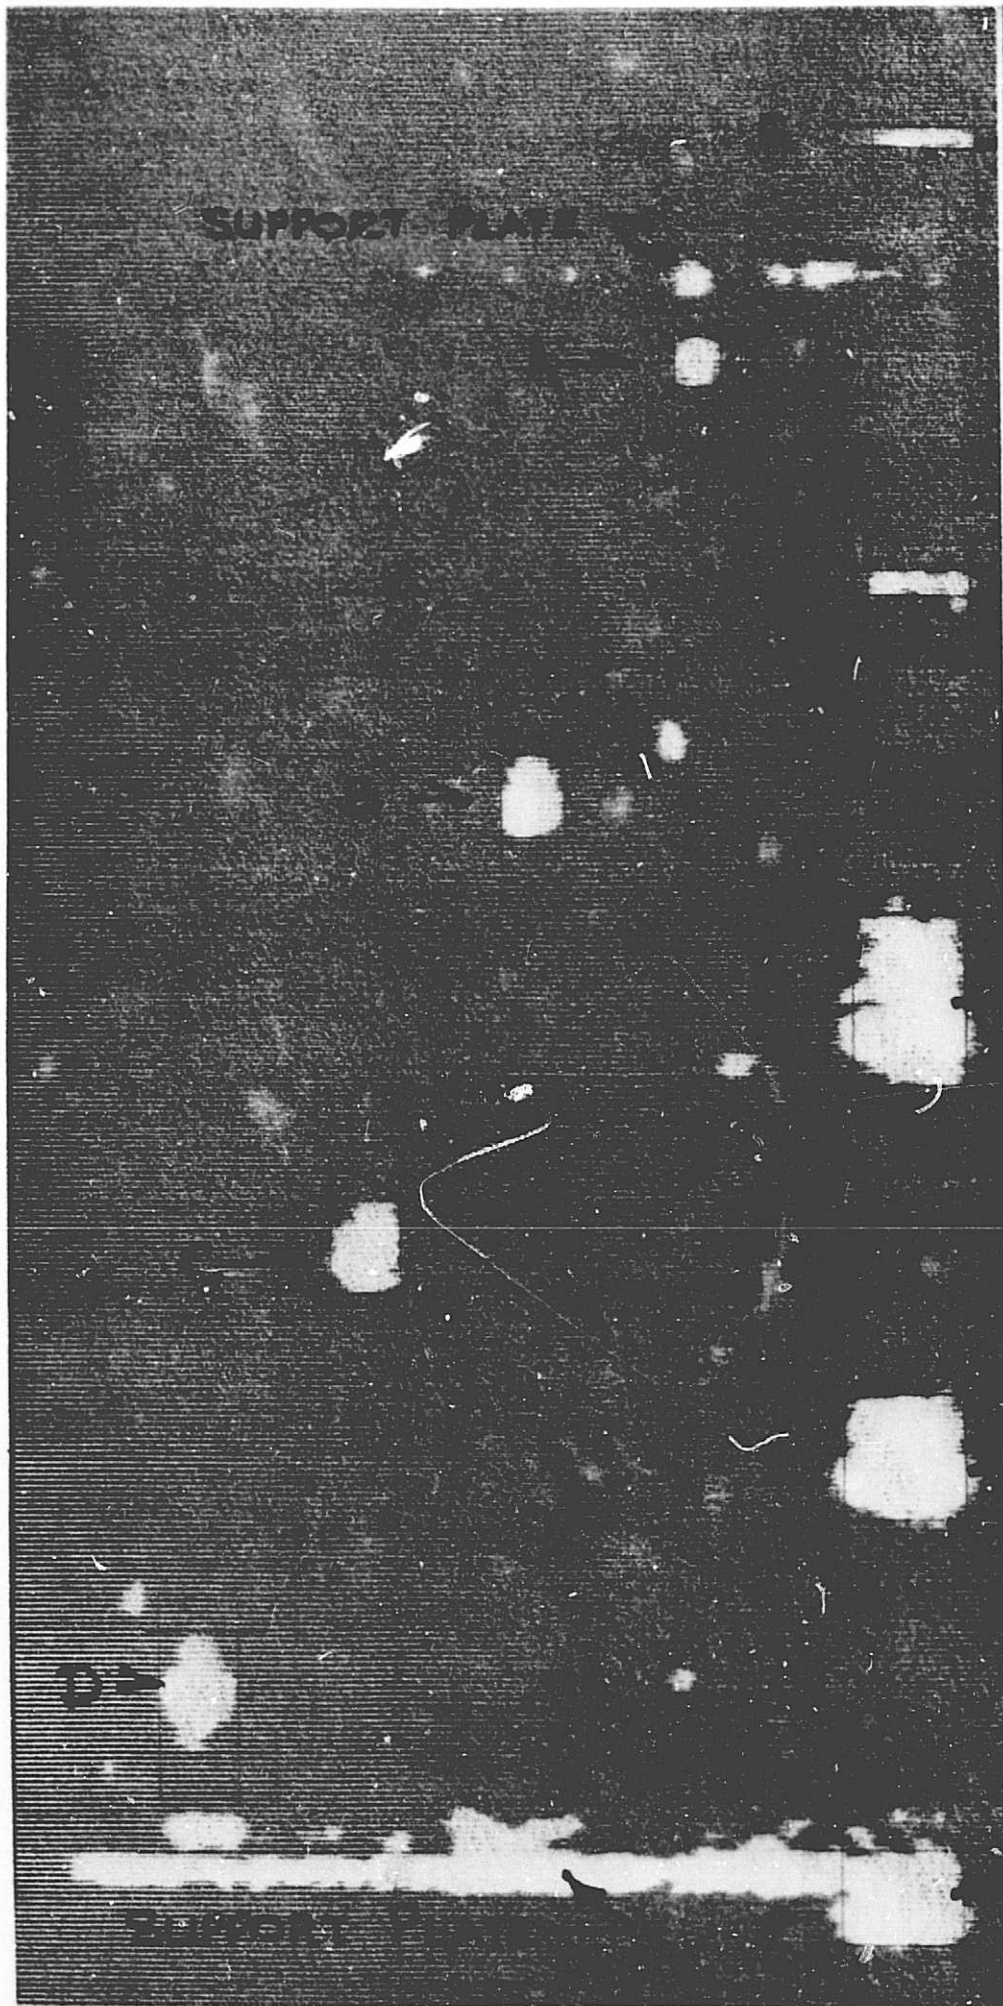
Delta ultrasonic scan recording showing test hole indications from 0.500-inch thick aluminum plate, higher gain setting and separation distance than Figure 13.
